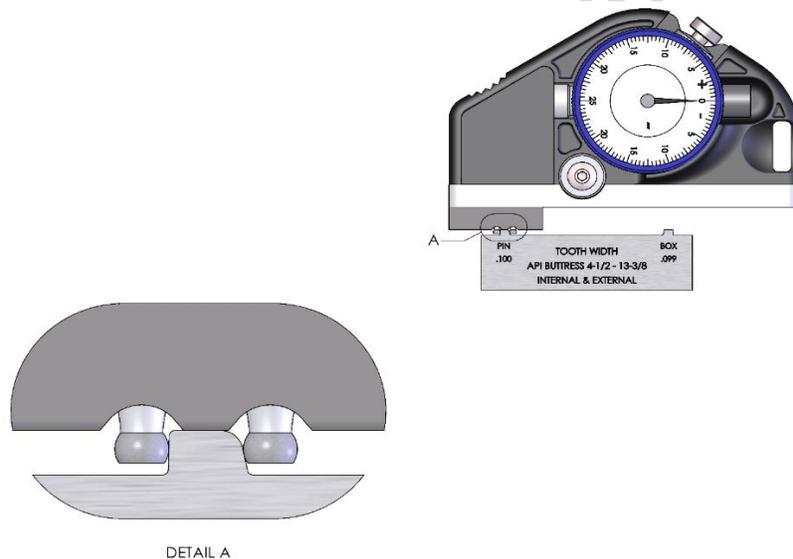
Buttress Tooth Thickness/Width Gauge (Measured from Thread Crest)
